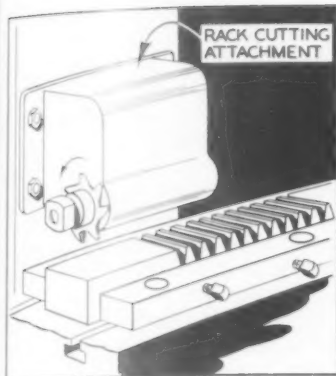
, at left, shows a rack cutting attachment for cutting racks on a miller. Indexing is done with the lead screw, the table being locked for each pass. However, special indexing attachments for rack cutting are available. Fig. 18, at right, shows a slotting attachment in combination with a plain indexing table, for cutting internal gears.
